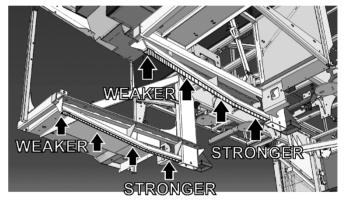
LIFTING POINTS NOT APPROVED FOR REAR-END TOWING — SIDE-MEMBERS LOCATED UNDER THE ENGINE CRADLE SUPPORT RAILS
